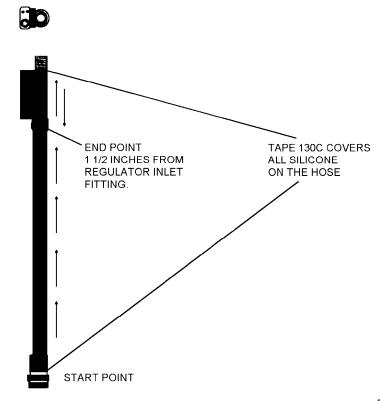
Modified Regulator to Seat Kit Hose Assembly Taping
